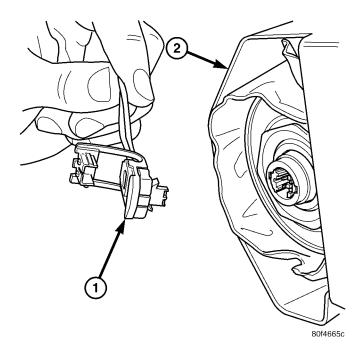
PASSENGER AIRBAG ELECTRICAL CONNECTOR
